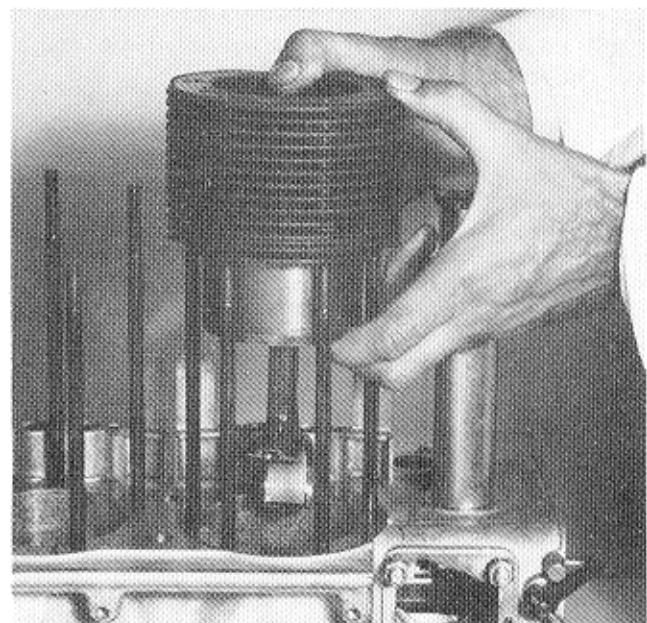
Cylinder, Piston and Connecting Rod Removal
